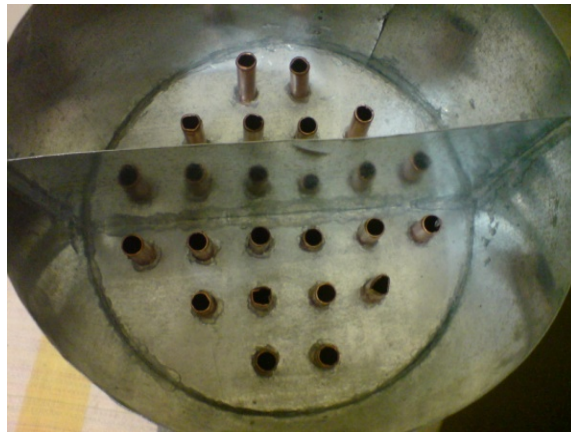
Front view of the assembly of shellside and tubeside without endcap
